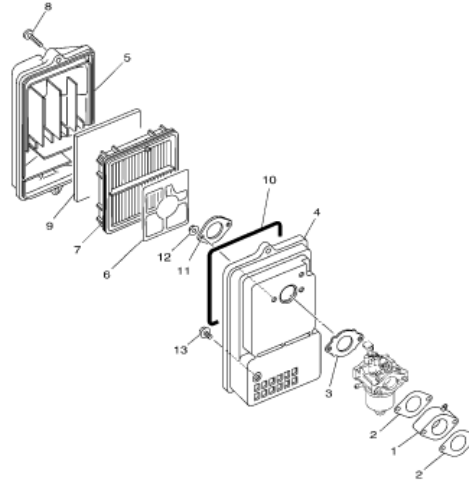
Base engine air filter, carburetor, and intake manifold
